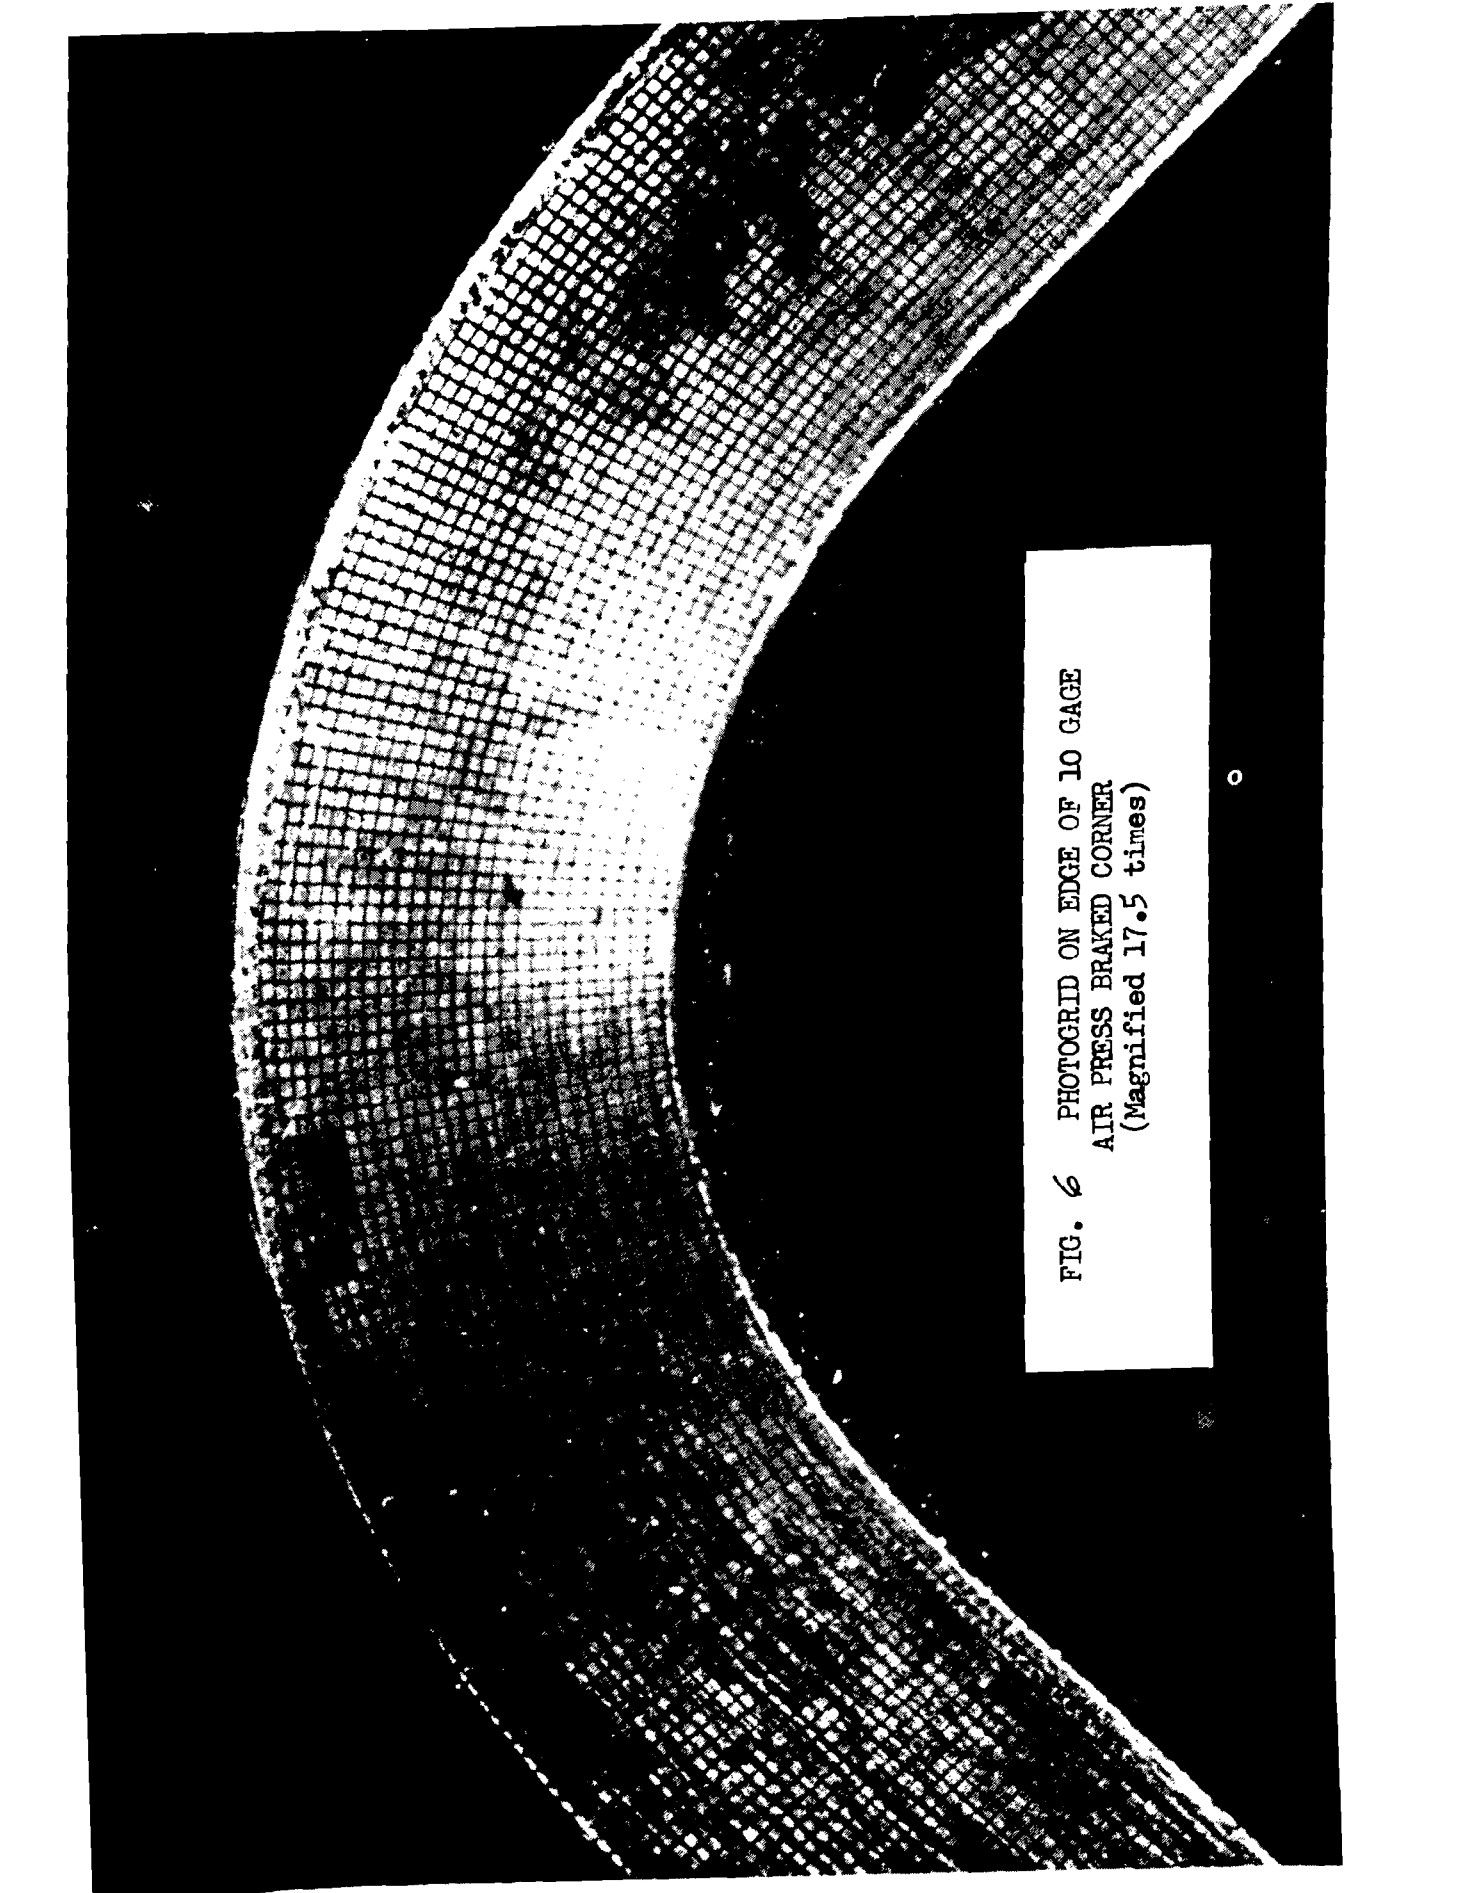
PHOTOGRID ON EDGE OF LO GAGE
